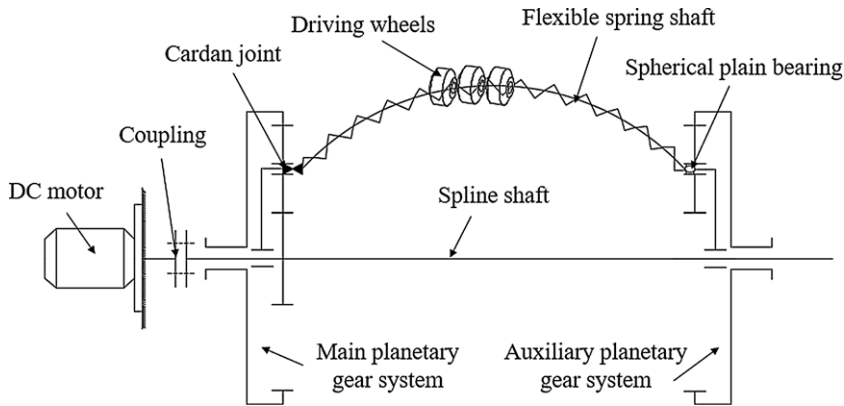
Transmission principle of in-pipe inspection robot (IPIR).
